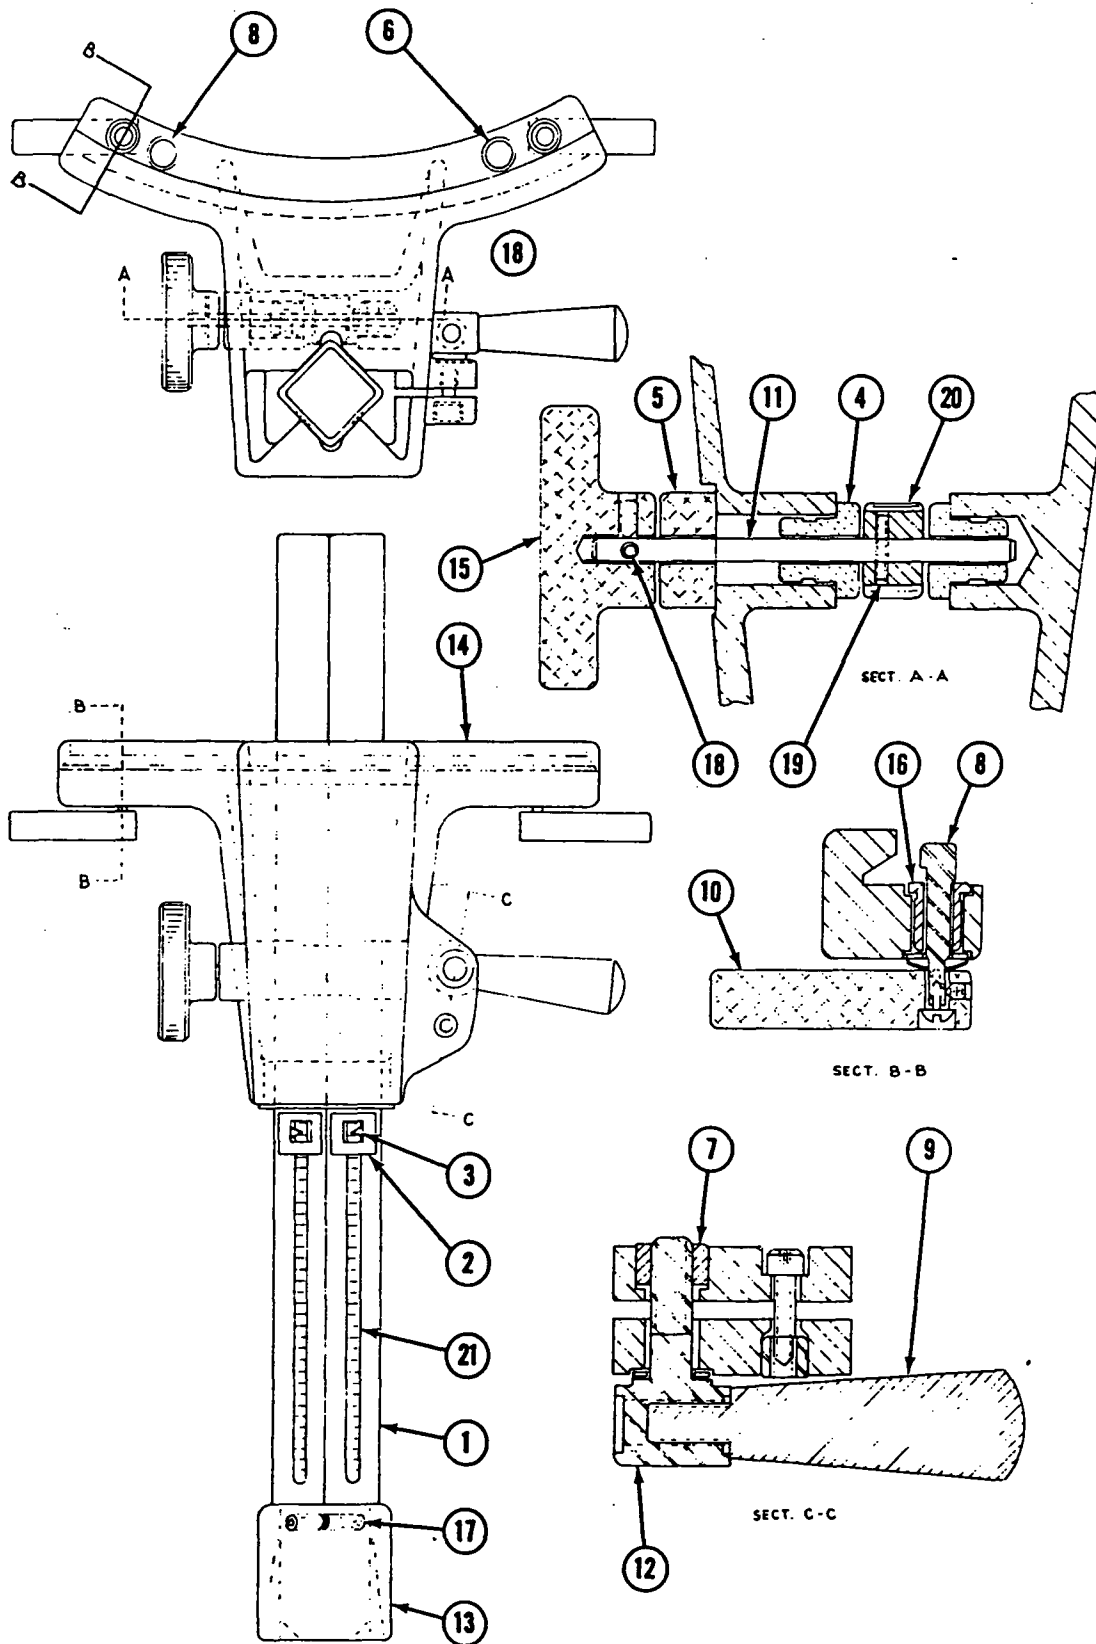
COBALT, ACCESSORY ATTACHMENT POST ASSEMBLY
